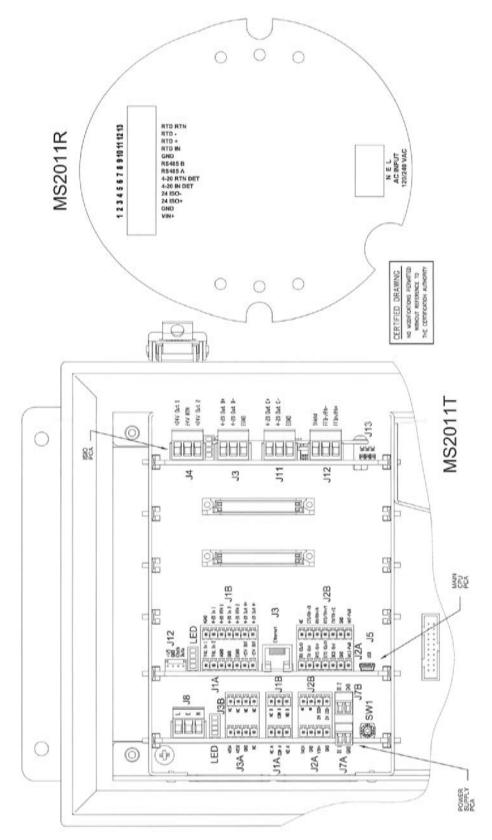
1-0702-049: Installation Wiring Guide, MS2011T & MS2011R (Sheet 1 of 4)
